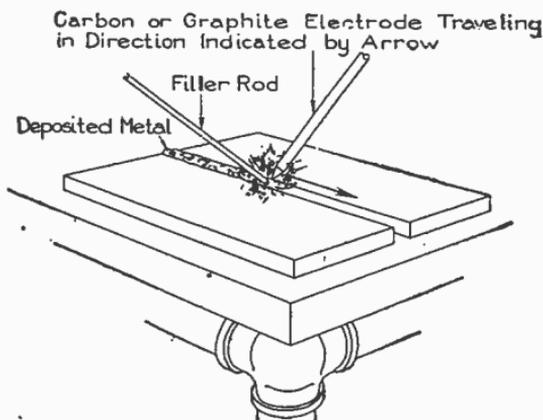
,106.—Direction of travel in making a carbon weld.
